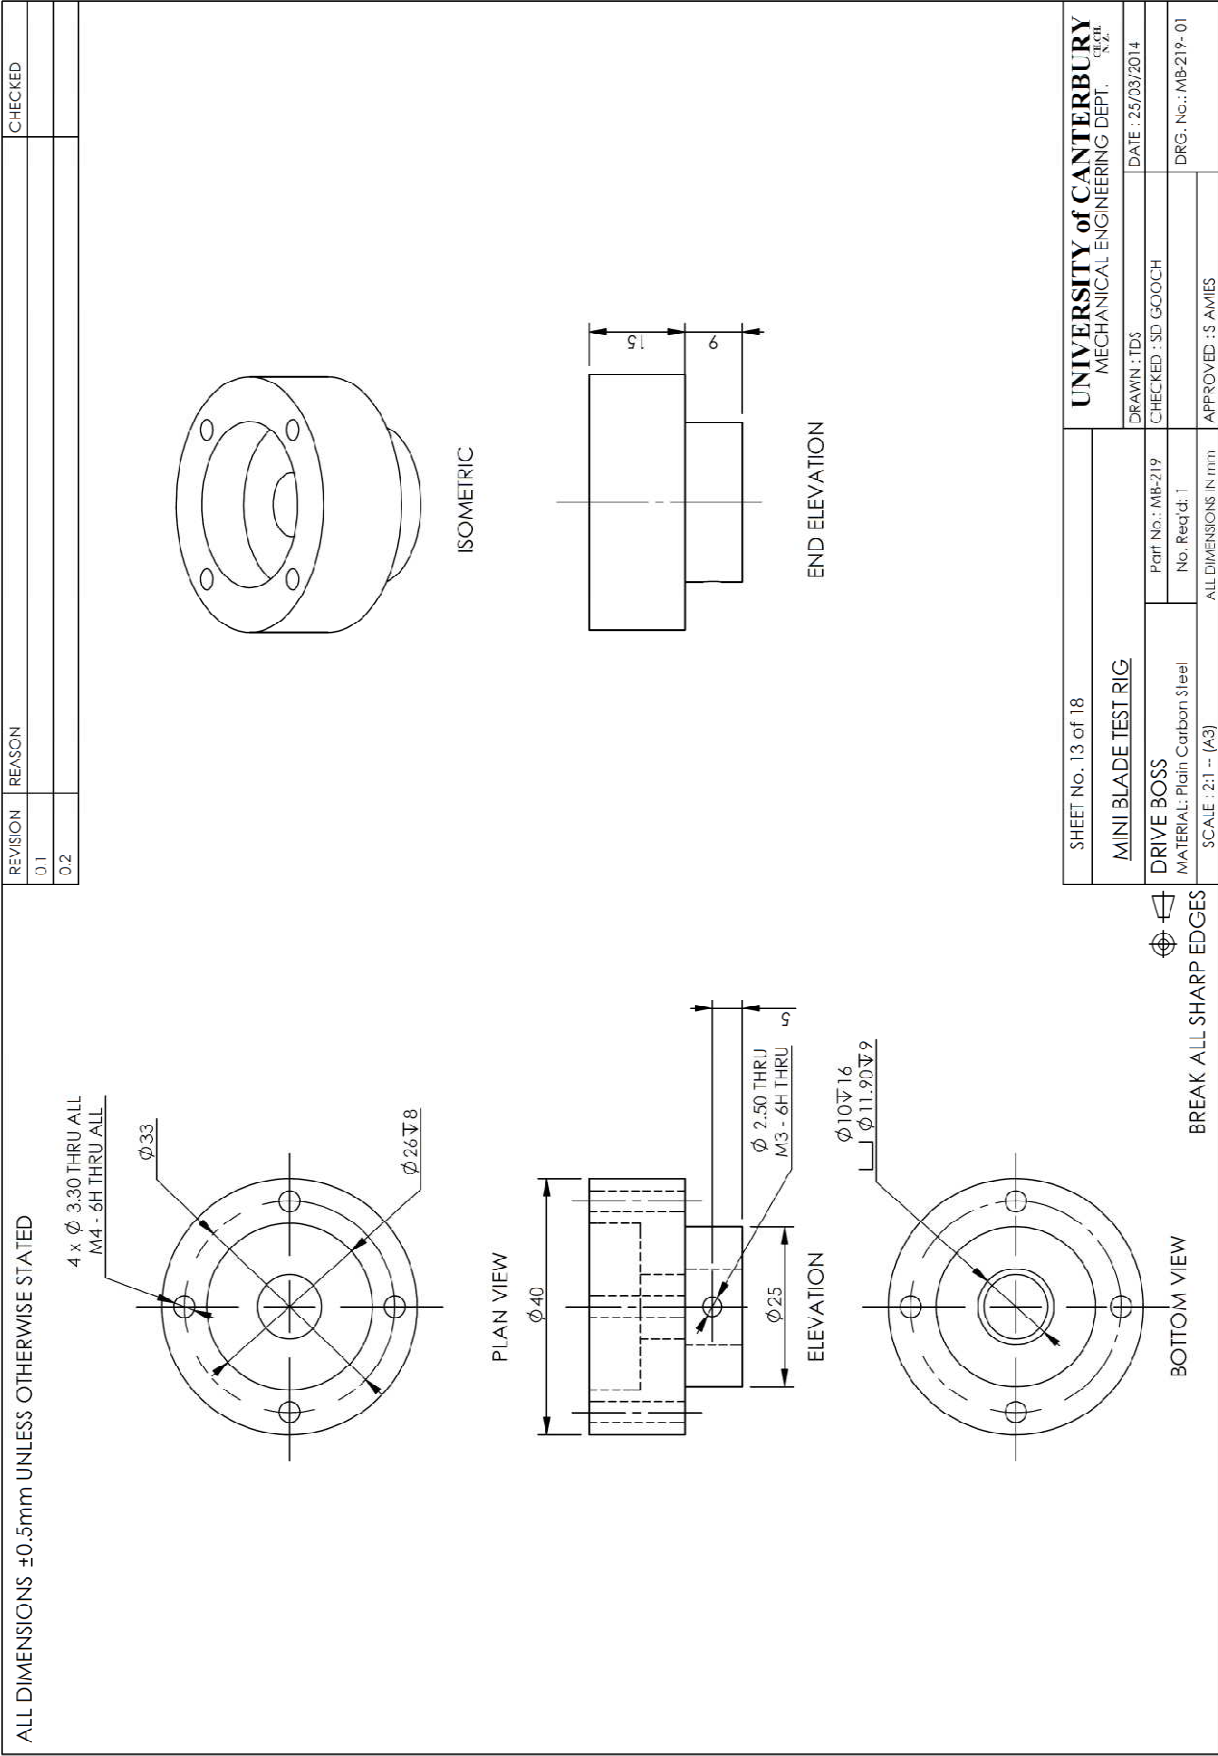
Manufacturing drawing for the drive boss in variable stroke test rig.
